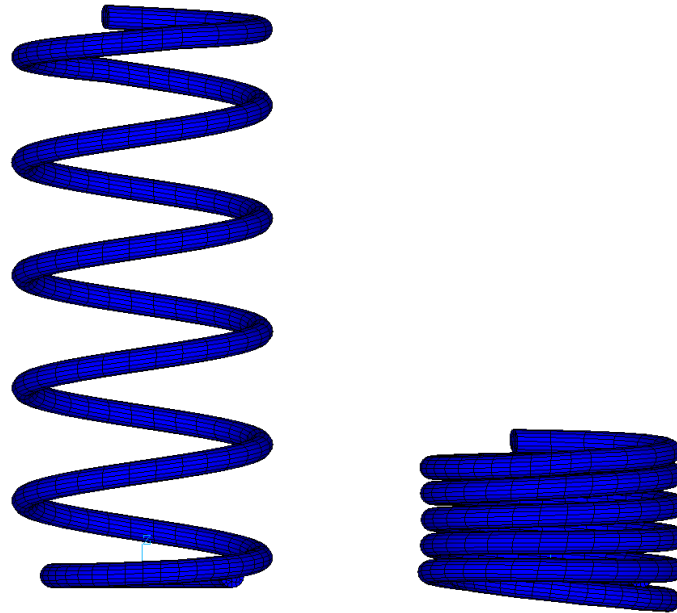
Unrealistic deformed shape produced by clamping the flat part of the end coil, but not preventing the subsequent coils from passing this point.
